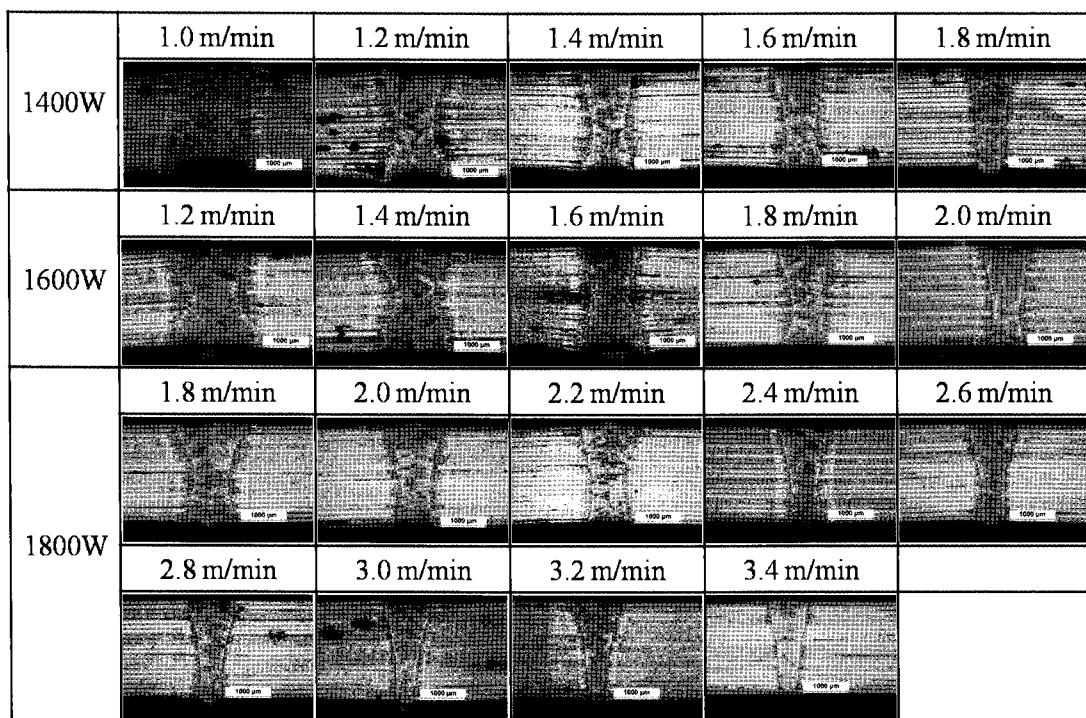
Welding cross-sectional area to variation of welding speed and power
